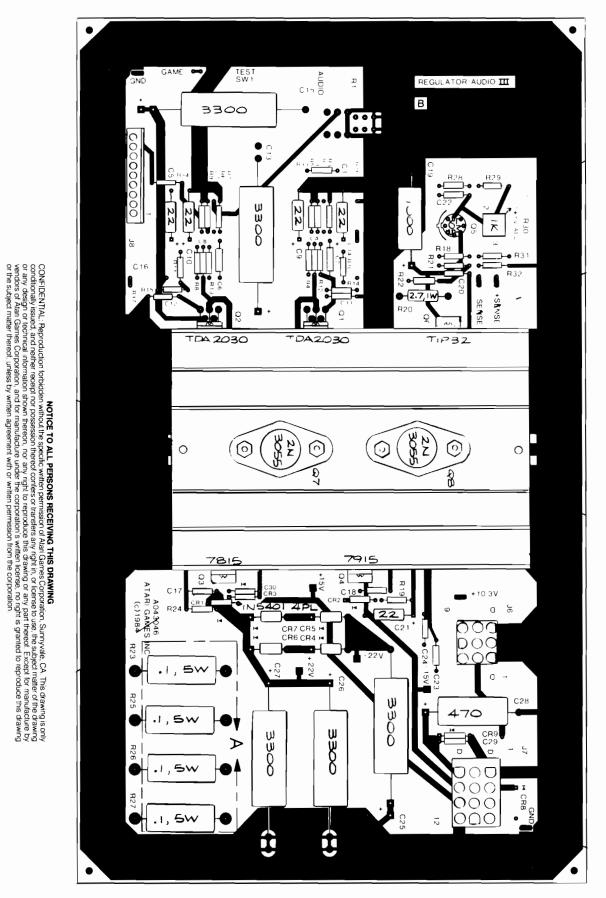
Regulator/Audio III Printed-Circuit Board Assembly A043046-01 C
